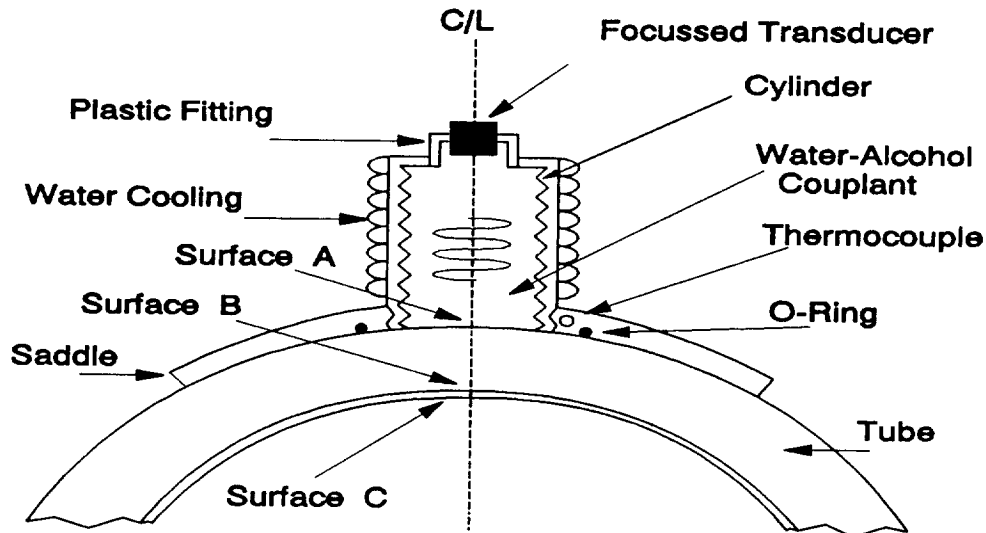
Sketch of the transducer assembly which utilizes liquid-buffer coupling.
